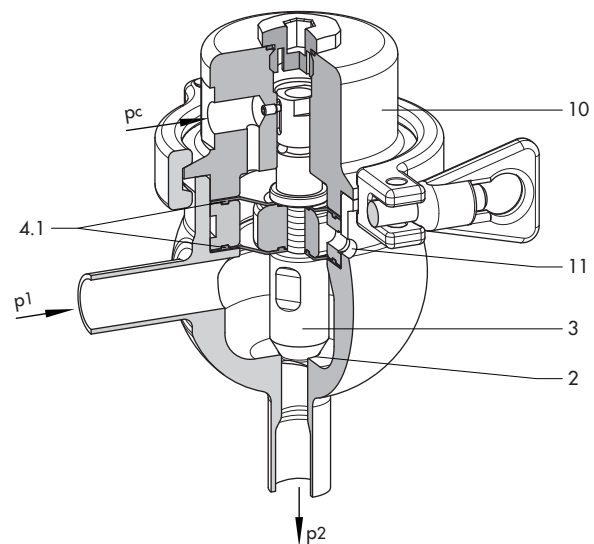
· Typ 2371-00 with pneumatic set point adjustment
